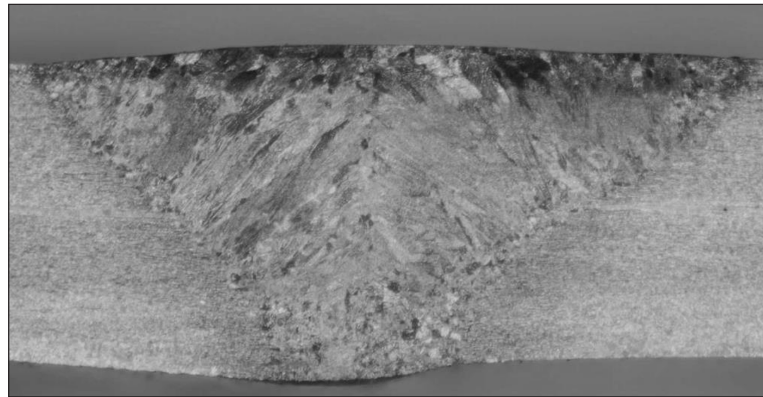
The structure of the weld obtained on AISI 304 steel 2 mm thick using plasma welding (Table 1)
